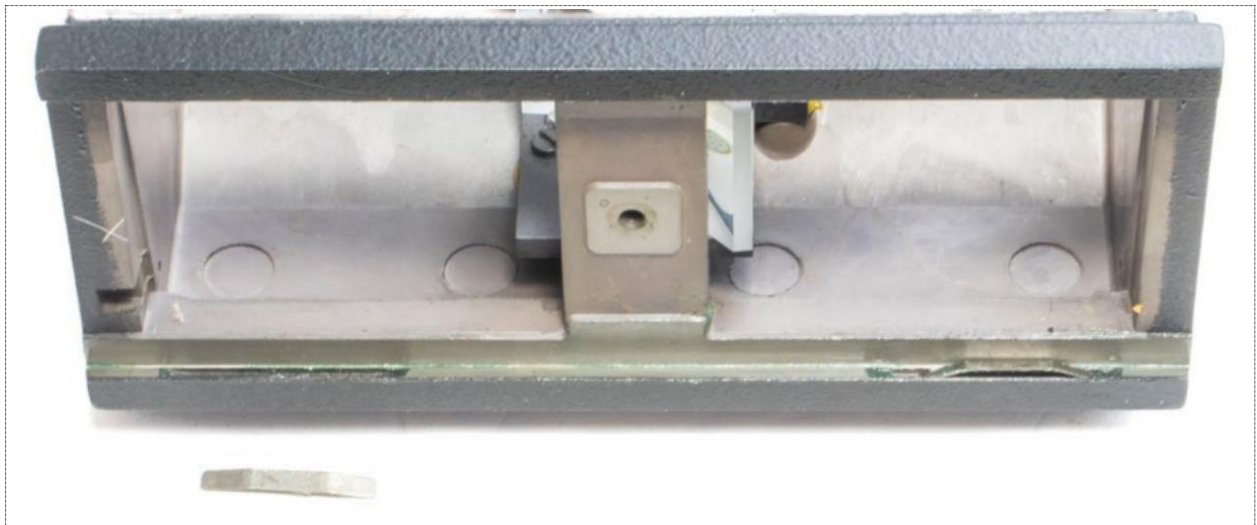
The front of the head base after the interpupillary distance adjustment slides have been removed. Note the springs from the lower slide rail (the left spring has been removed and placed below the head.)
